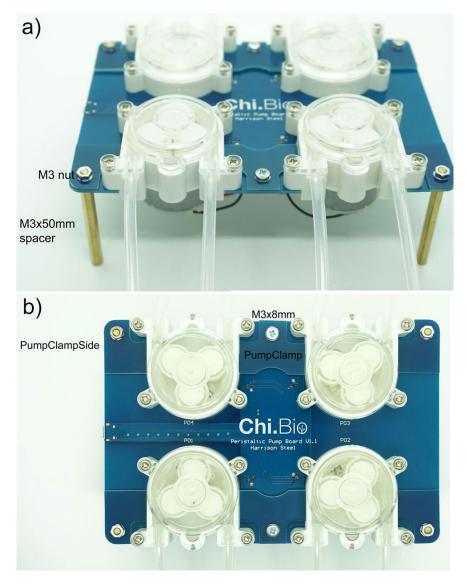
Assembly of the pump PCB, which uses four peristaltic pumps, M3x50mm PCB spacers, M3 nuts, and the PCBs PumpClamp (x2), PumpClampSide (x4), and Pumps (x1). Note that the pump board can be assembled with only two or three pumps, depending on the user's needs.
